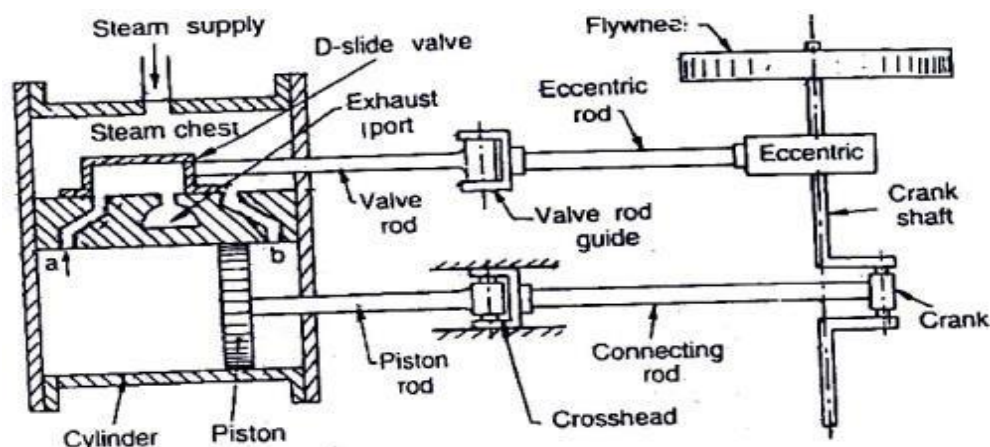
Single cylinder, double acting horizontal reciprocating steam engine
